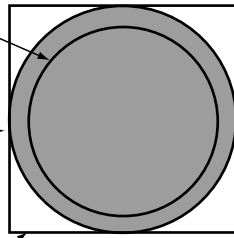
Footprint - 5 mils stencil - non solder mask defined
